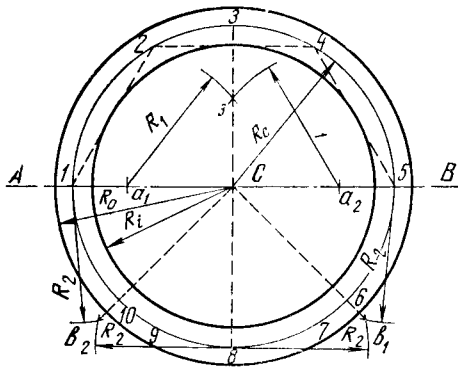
Laying out holes in flanges in conformity with geometric rules
